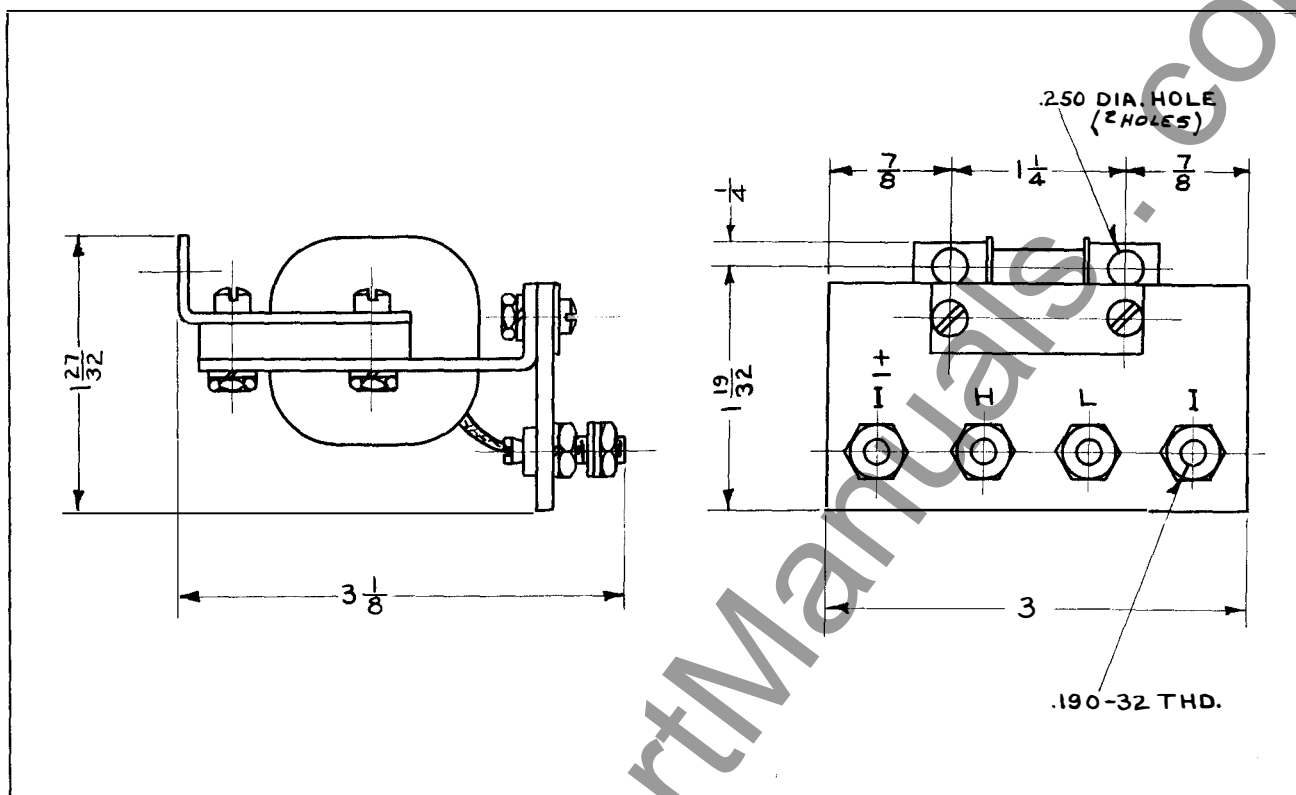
Outline of the Test Milliammeter Auxiliary Transformer. For Reference Only.
